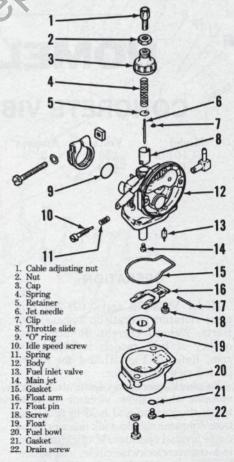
A - Exploded view of Keihin floattype carburetor used on later Models HB-280, HB-480 and HB-680.
